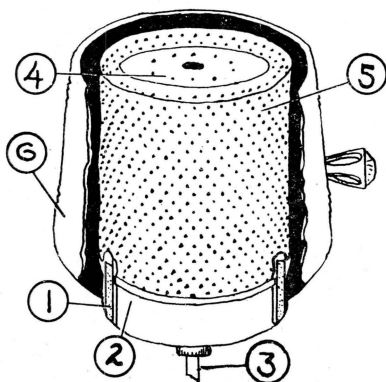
Short-chimney burner using asbestos kindler or lighting ring
